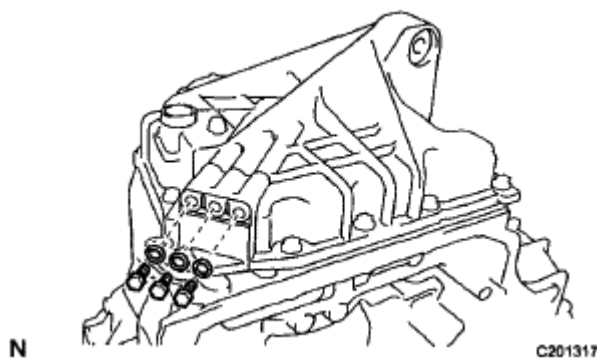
Locating No. 1 Automatic Transaxle Case Plugs
